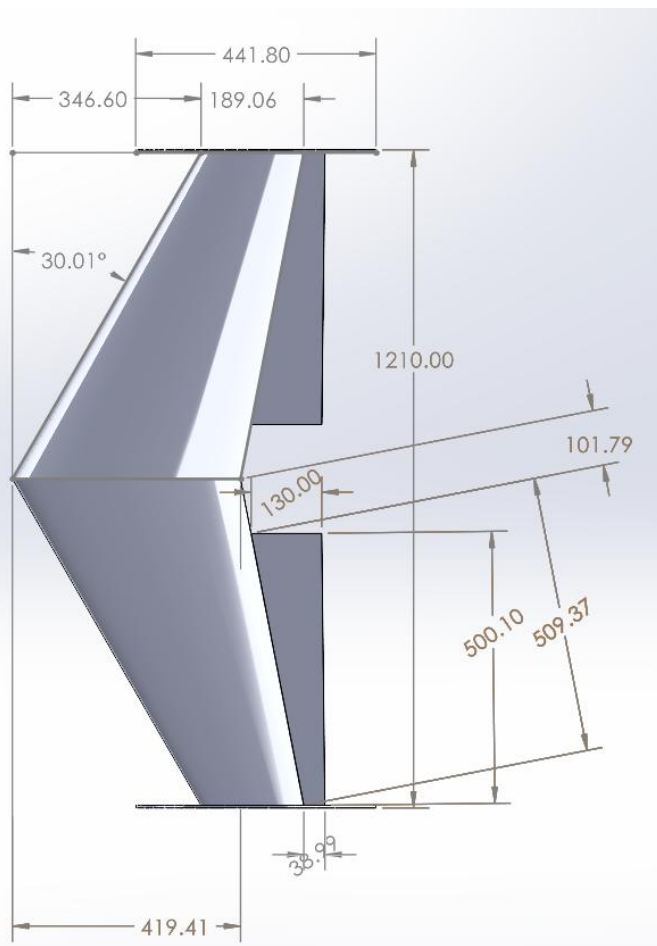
Planeview of rc-airplane modelled using SolidWorks, showing the main dimension
